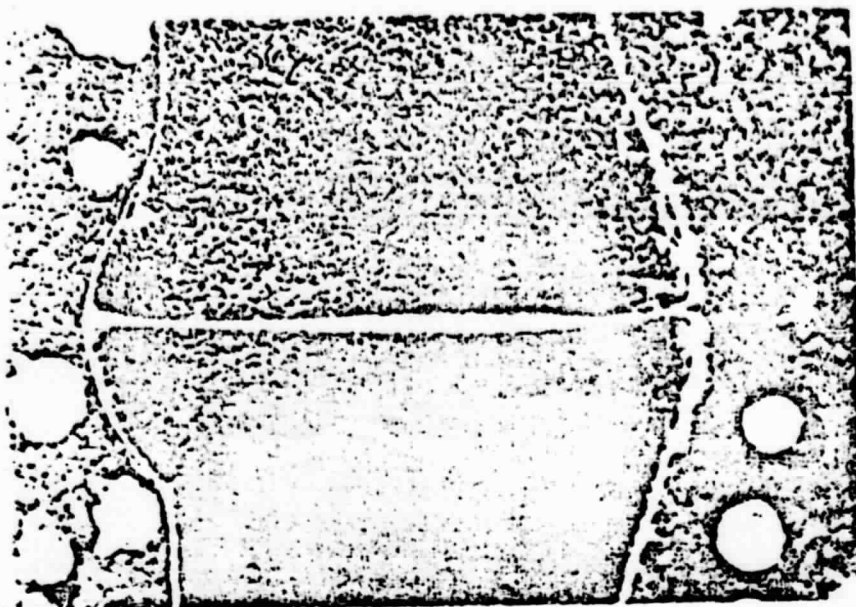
Cross-section of 4-in. stainless steel pipe weld 14B. Inner diameter is on the left
